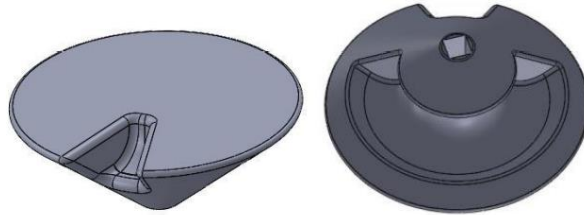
Left: top view of the air distributor. Right: bottom view of the air distributor.
